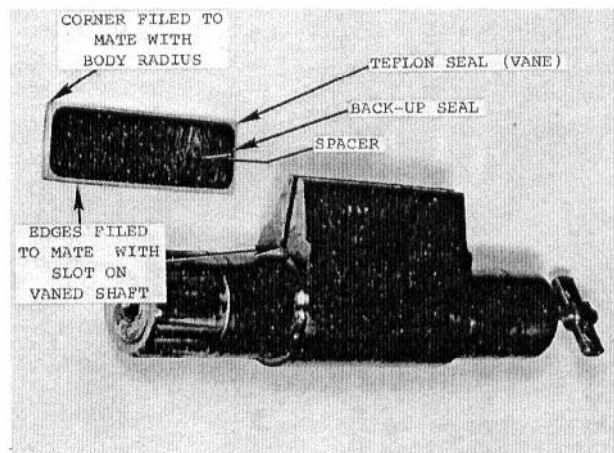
Shaping Teflon Seal for Moving Vane Shaft
